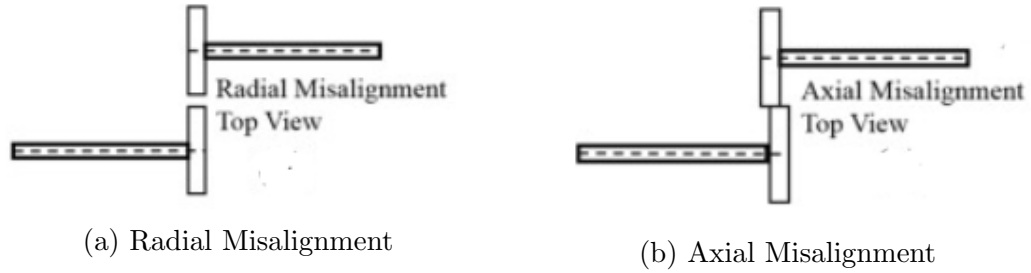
Two Type of Lateral Gear Misalignment[57]
